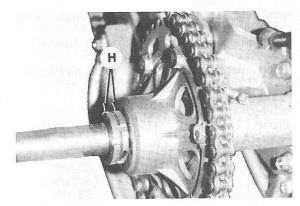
View identifies rear axle shaft retaining nuts (H).
